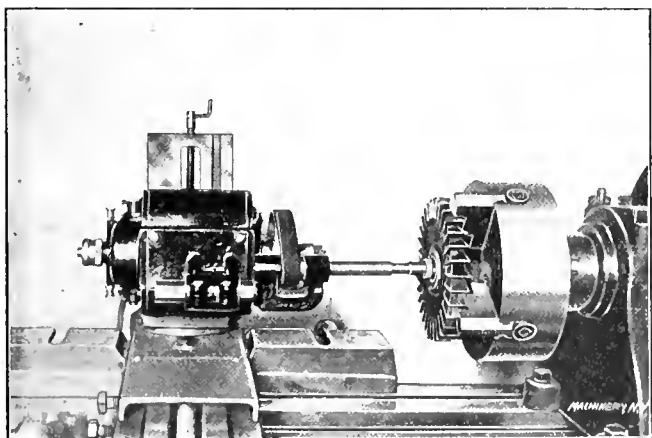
Internal Grinding Attachment. The Spindle runs 14,000 R. P. M.
